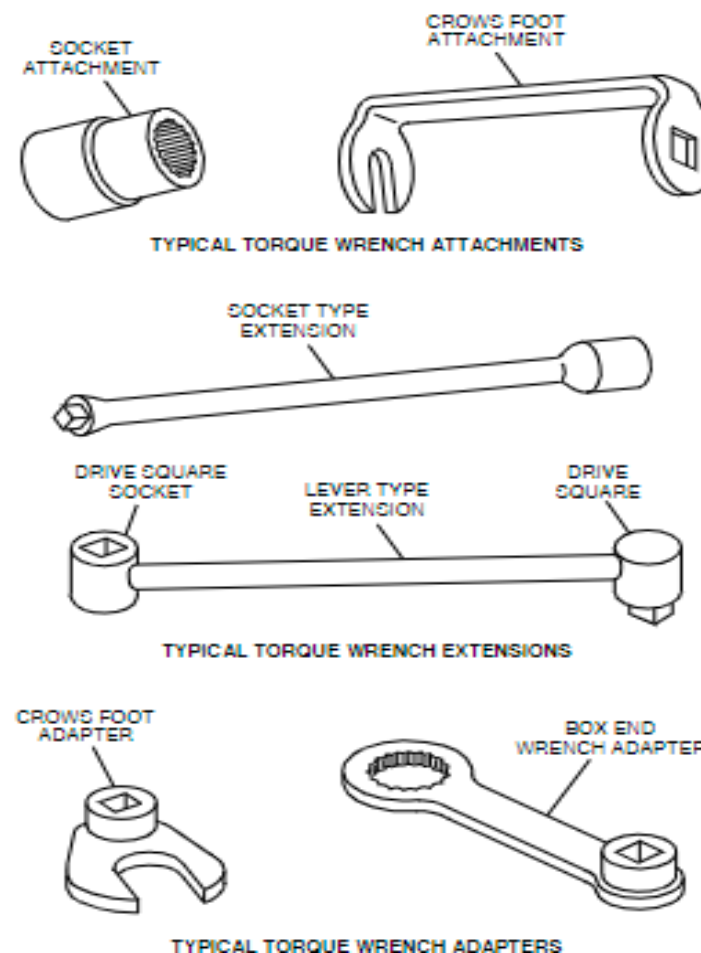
Typical Torque Wrench Attachments, Extensions and Adapters
